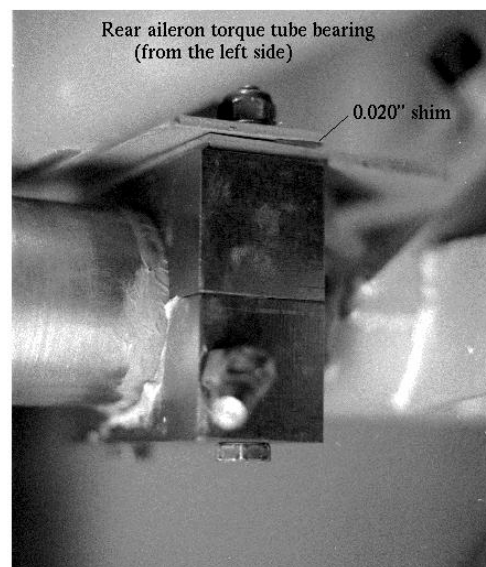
A fabricated needle bearing for the aileron torque tube. You can use the parts furnished with the kit, but considerable fitting (possibly involving some machine work) will be required to reduce control friction to acceptable levels.
